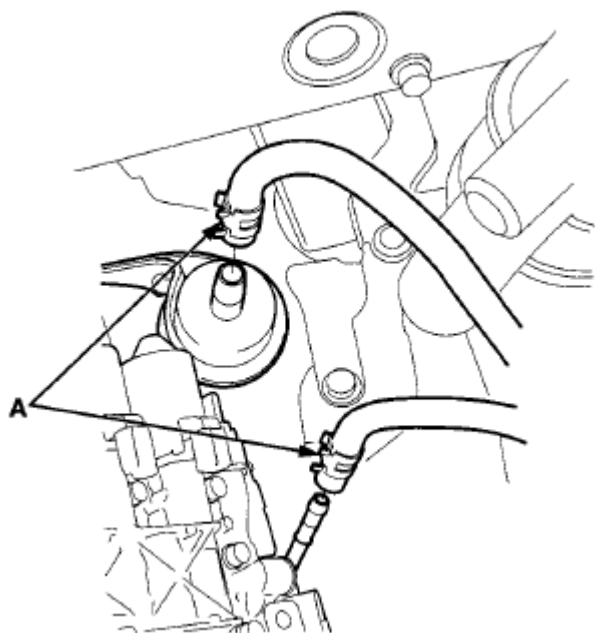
Connecting ATF Cooler Hoses To Transmission
